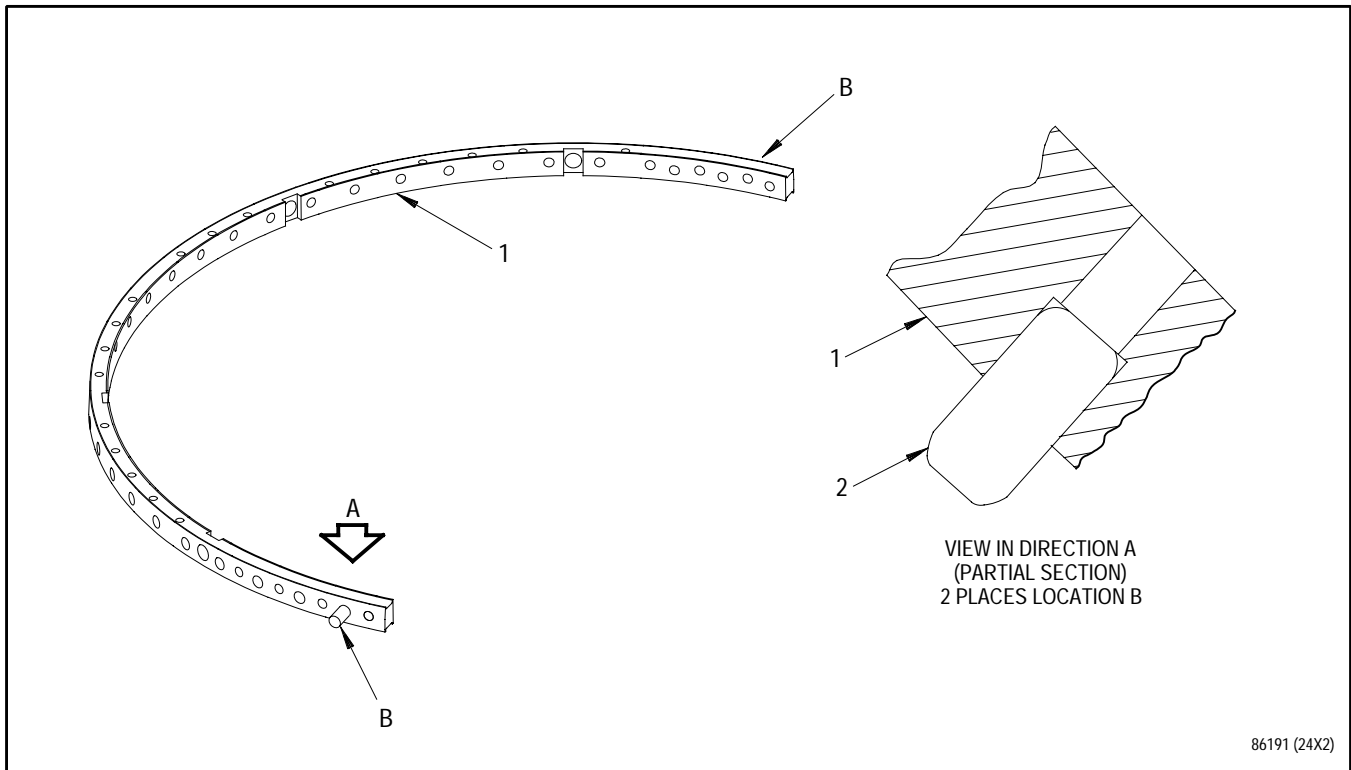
Rear Compressor Inlet, Fourth, Fifth, and Sixth Stage Stator Synchronizing Ring Assemblies - Bearing Replacement
